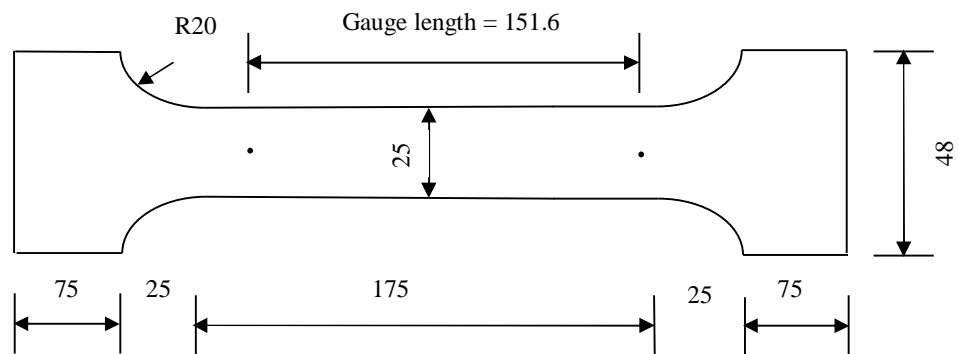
Different dimensions for the test specimen (all dimensions are in mm)
